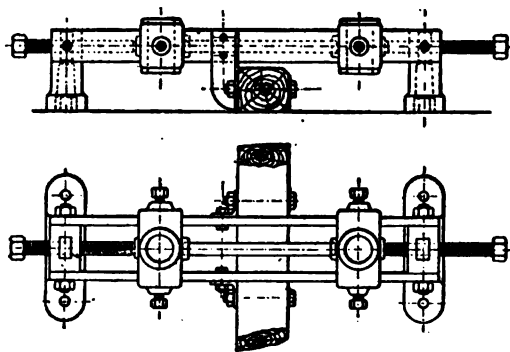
and 276. Type of Tightening Gear for Conveyors with Spur Gears.
